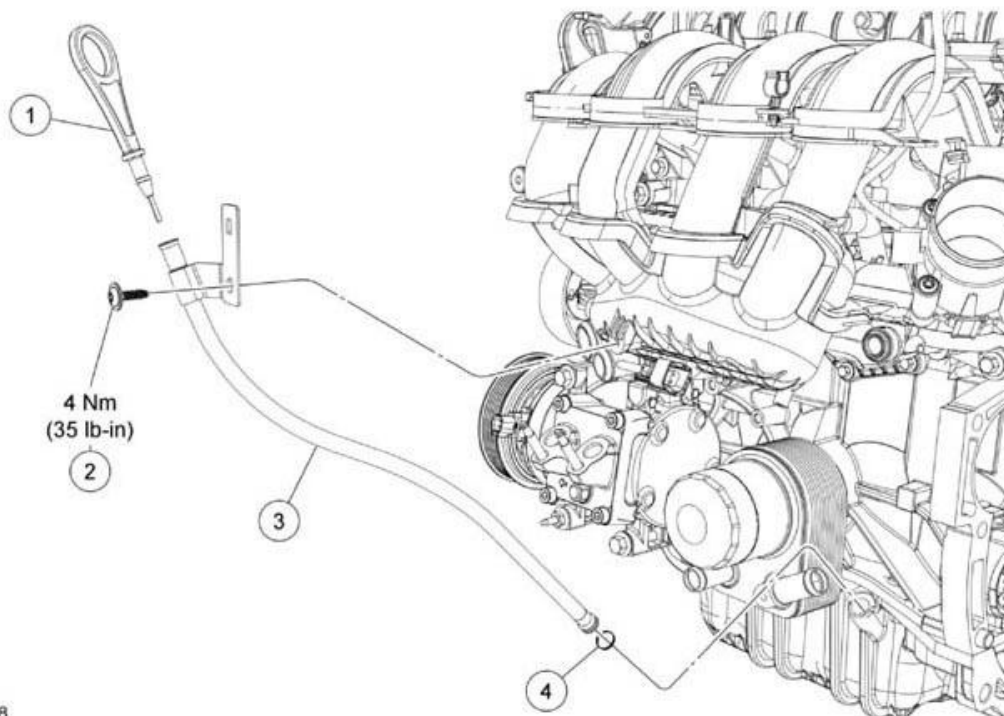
Identifying Oil Level Indicator And Tube Components With Torque Specifications
